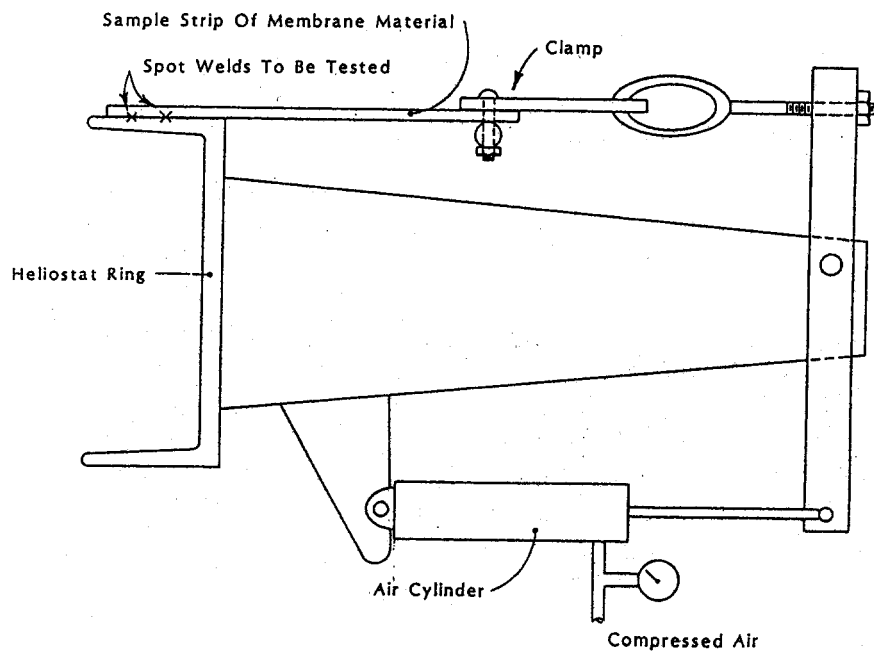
Apparatus to Test Membrane-to-Heliostat Ring Weld.
